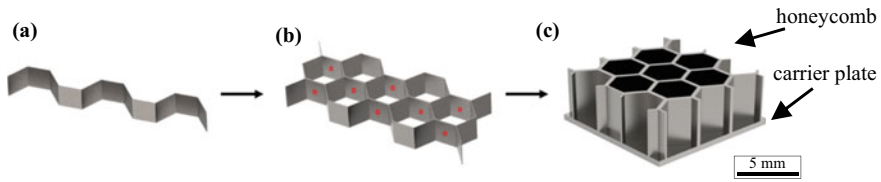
Honeycomb seal manufacturing schematic: a corrugated half-hexagon structure, b spot-welding and c honeycomb structure brazed onto the carrier plate
